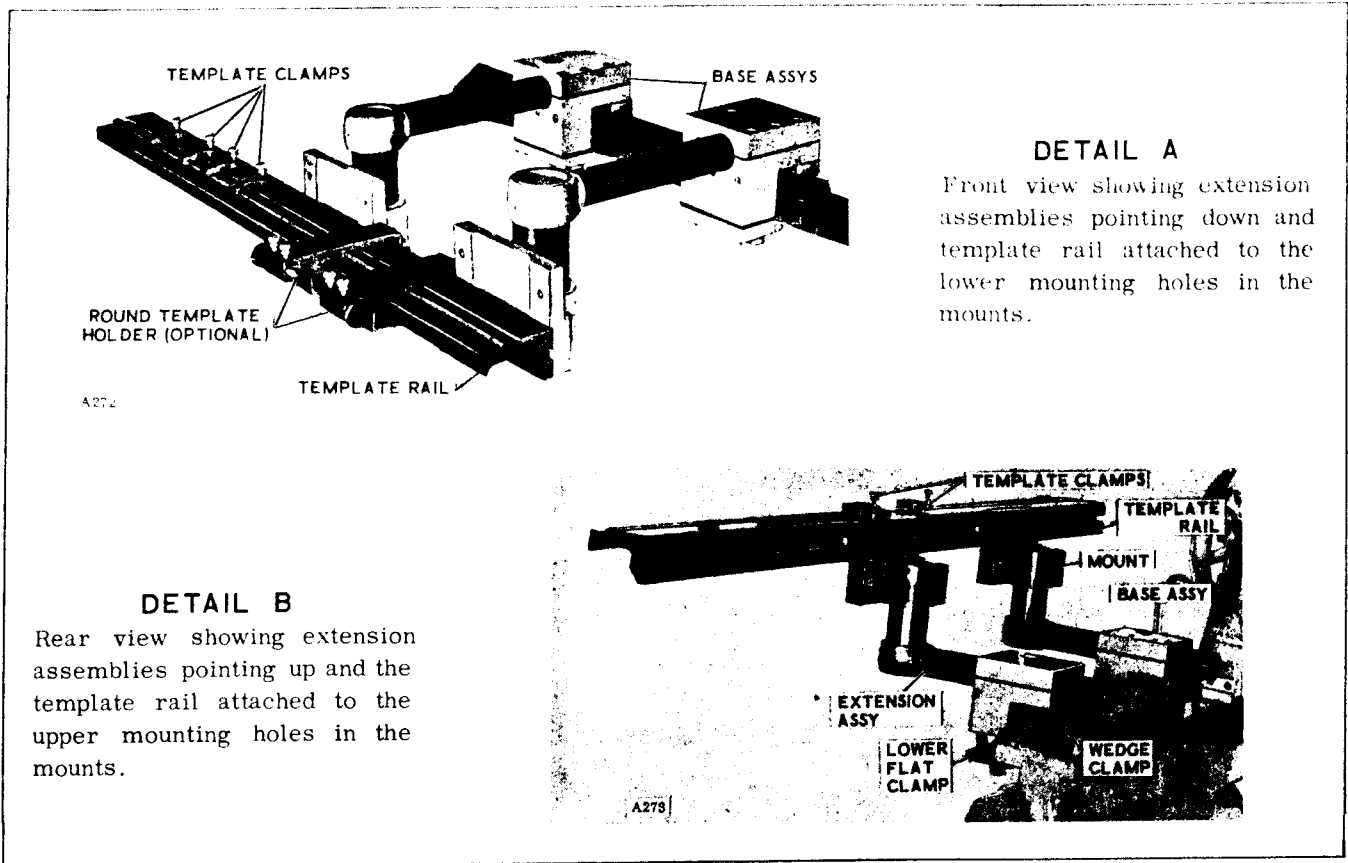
Typical Universal Template Rail Assembly. Used with Mark IIA thru VI Series)
